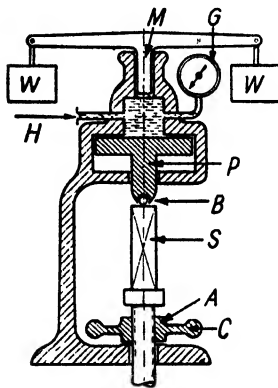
PRINCIPLE OF HYDRAULIC BRINELL TESTING MACHINE
